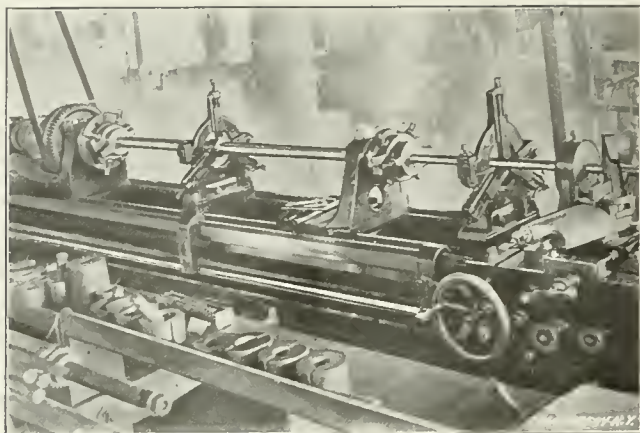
One End of the Lead-screw Lathe—Note Extension Driving Head
